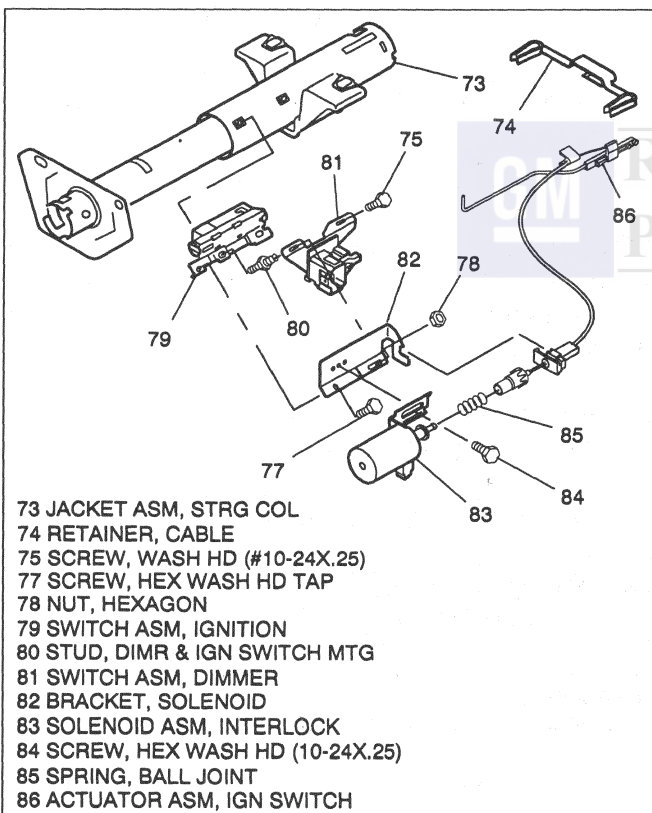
Removing Ignition, Dimmer Switches, and Solenoid Assembly
